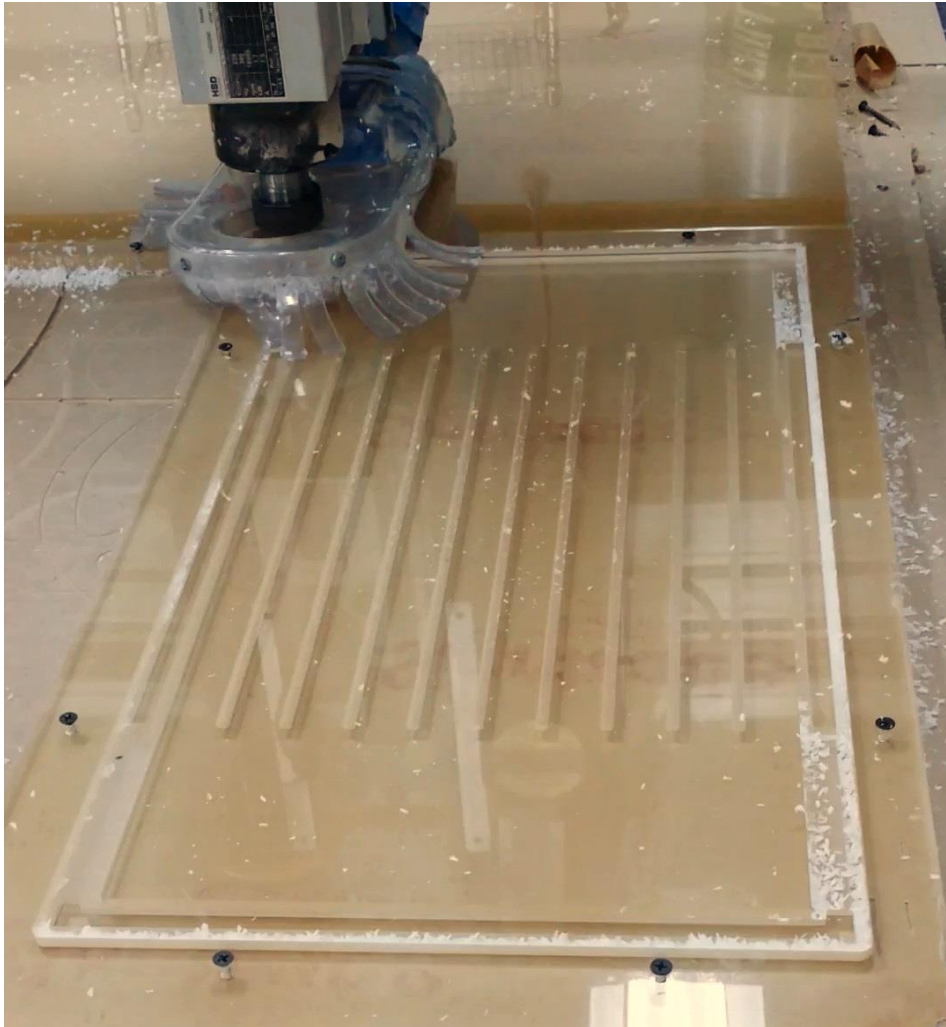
The design being cut using the CNC machine, the grooves were be fitted with spacers, to create channels.
